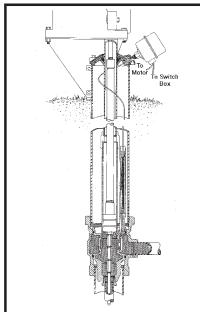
Monitor PR Unit cutaway to show 8AWAPA Control Kit installed in operating position.
